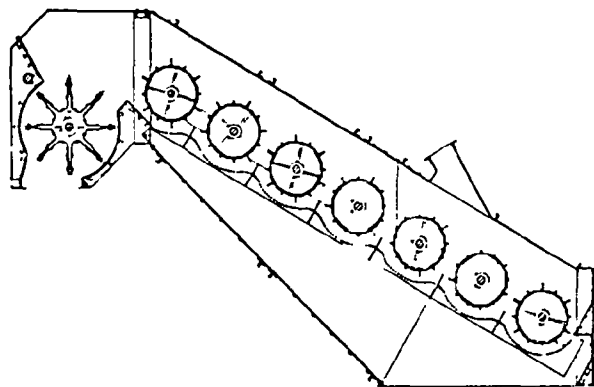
Cross section of 7-cylinder inclined cleaner.
